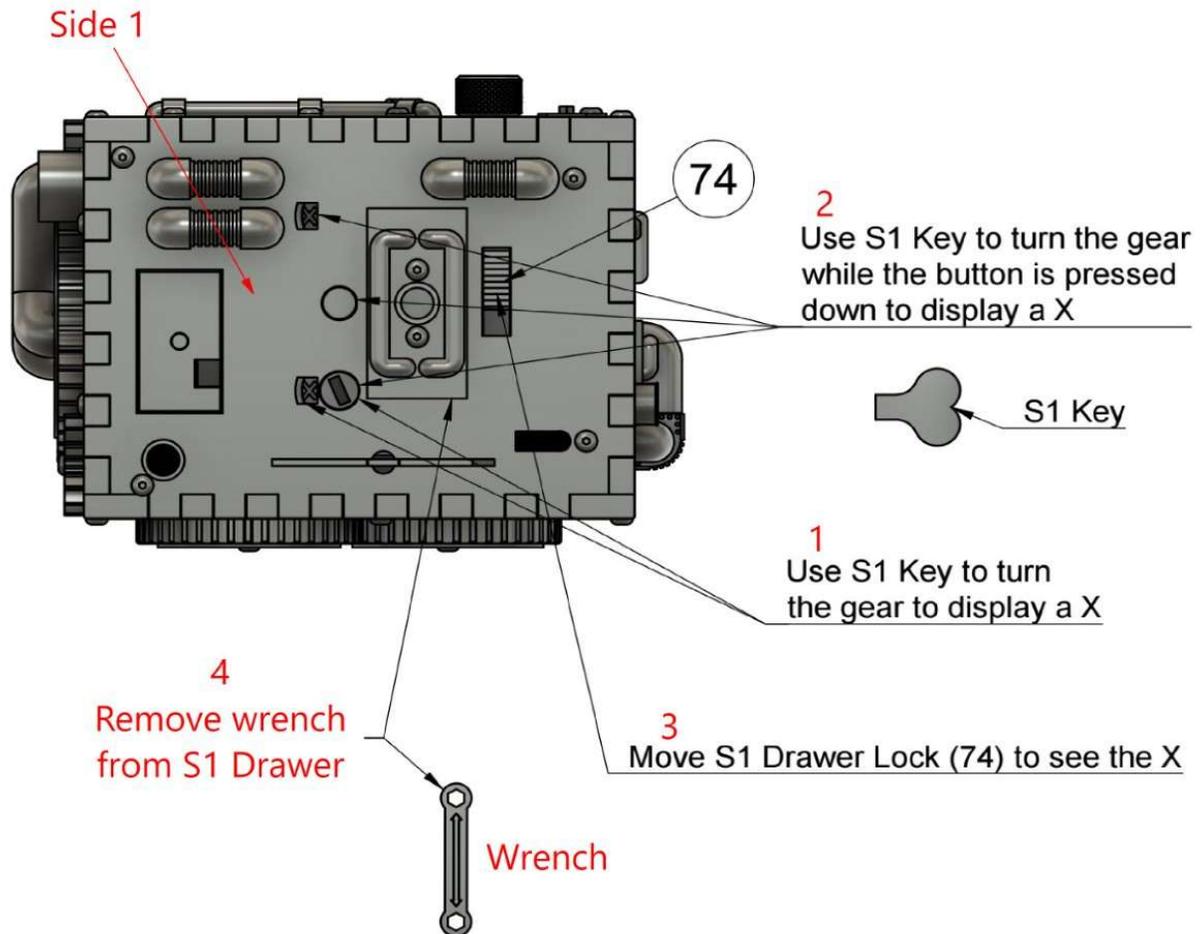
The Other Three Sides of my Steam Machine Puzzle Box
